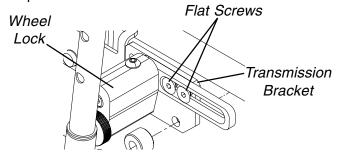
INSTALLING/REMOVING THE CLD WHEEL LOCK
